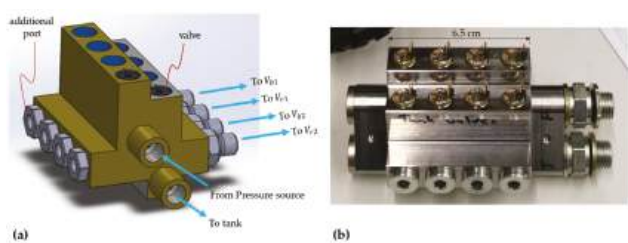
Valve manifold housing eight 2/2-way valves: (a) CAD; (b) procured valve block.
